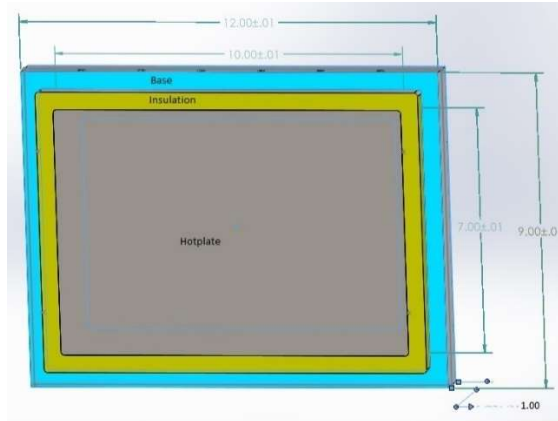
The base assembly including the hot plate and the insulating ceramic (yellow).
